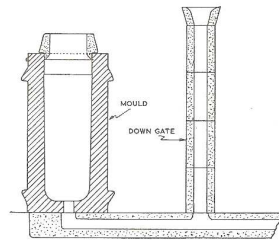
Assembly for the bottom pouring of steel ingot
